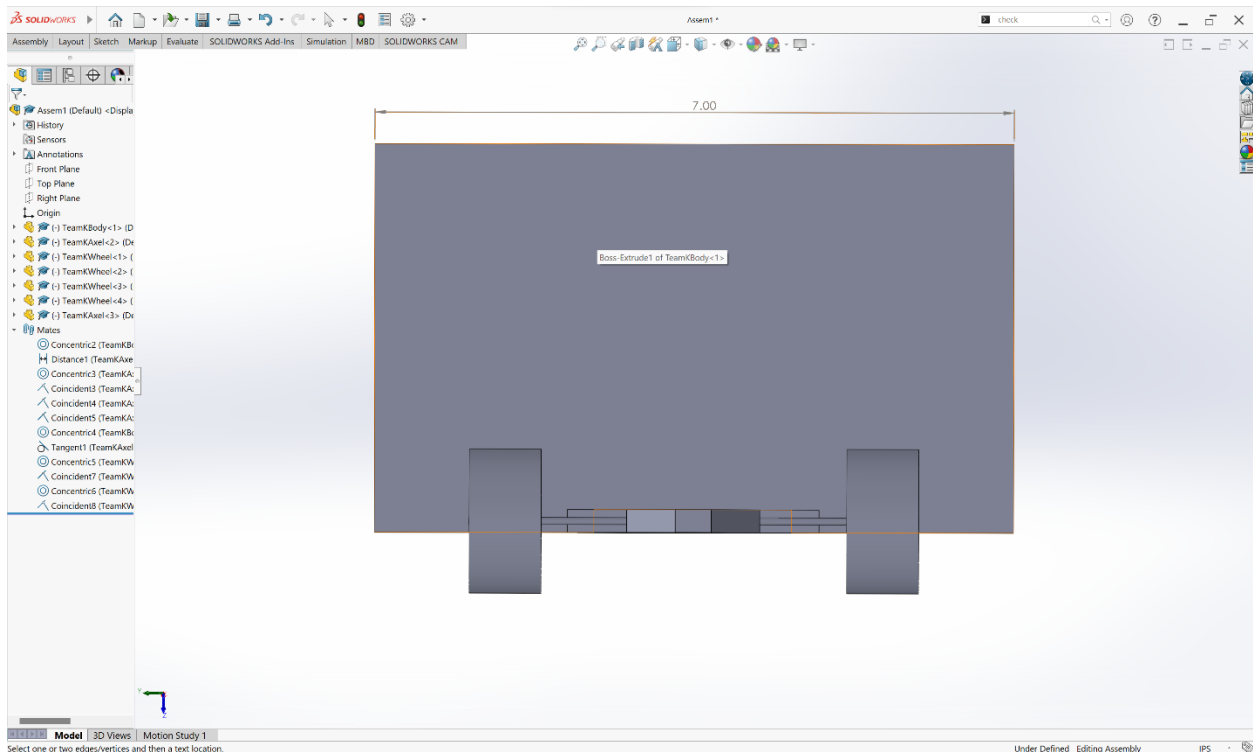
This shows the top/side view of our wheel which show how thick our wheels are.
